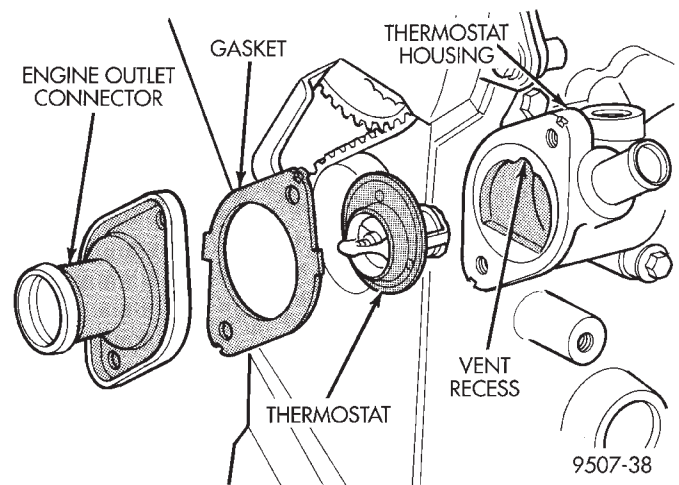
Thermostat, Housing, and Outlet Connector—2.4L Engine
